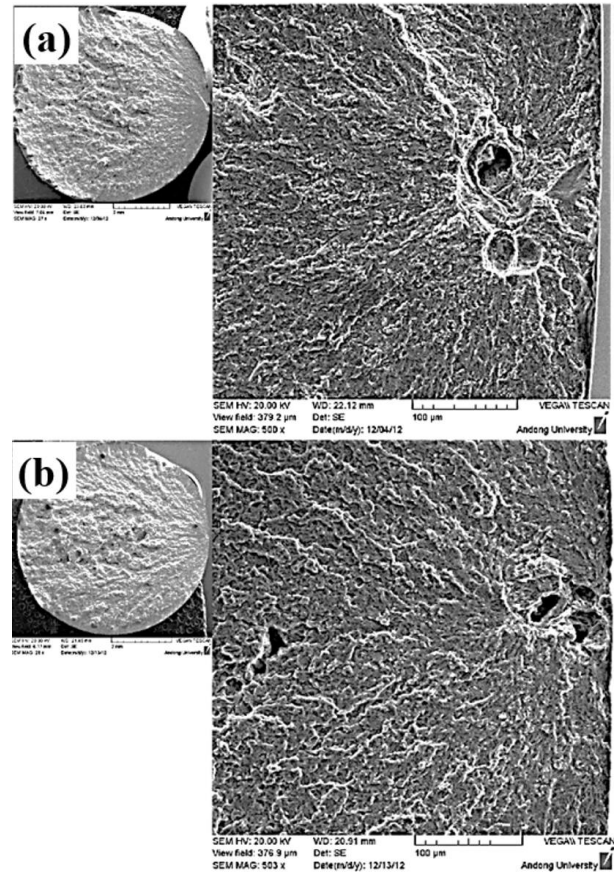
Fatigue fractographies of modified ADC12 specimens ; with (a) 0.6% Mg and (b) 0.8% Mg
